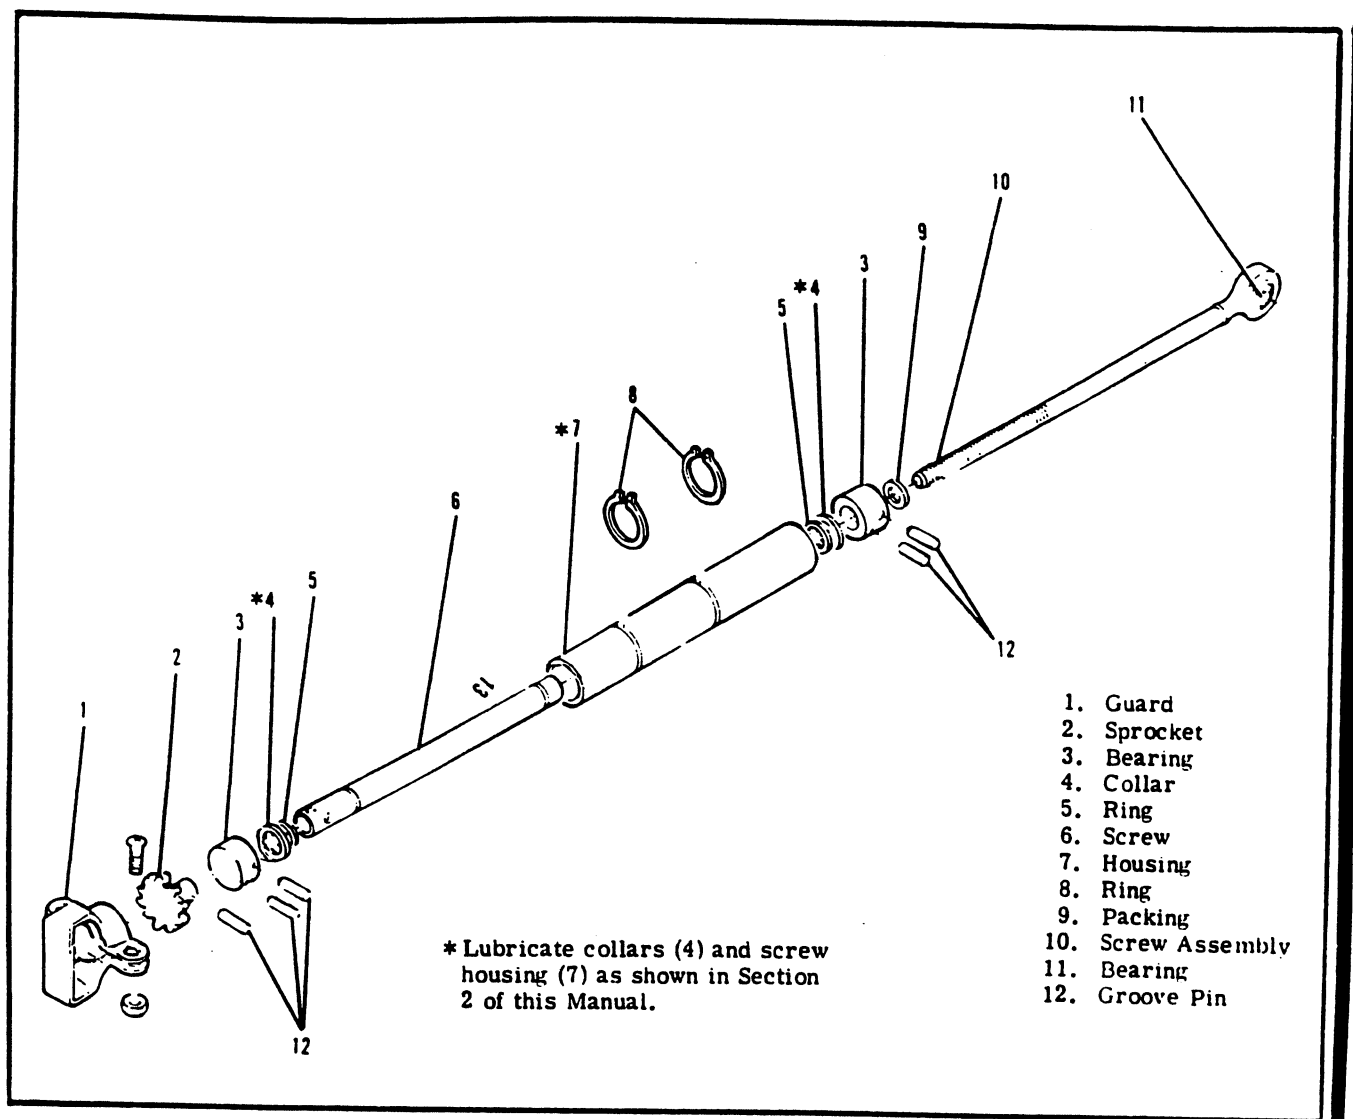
A. Elevator Trim Tab Actuator Assembly
